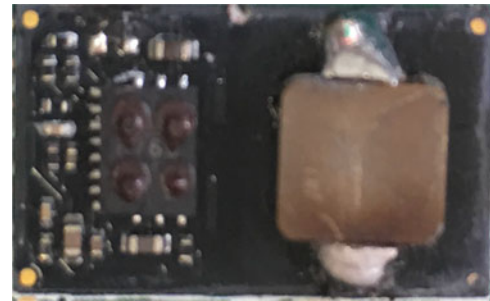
PCB of the power module with the selected metal powder composite inductor.
